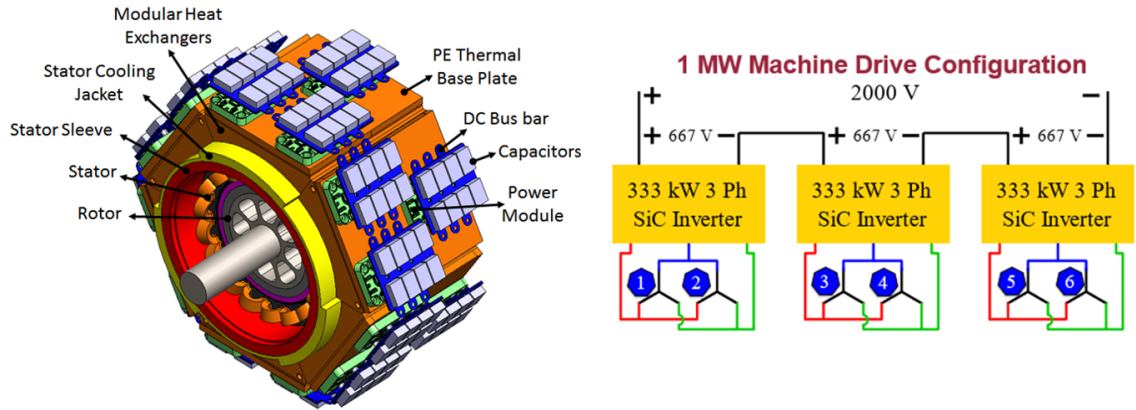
The 1 MW “integrated motor drive” machine assembly rendering and drive configuration (Figure courtesy of UW-EMPEC and OSU-CHPPE)
